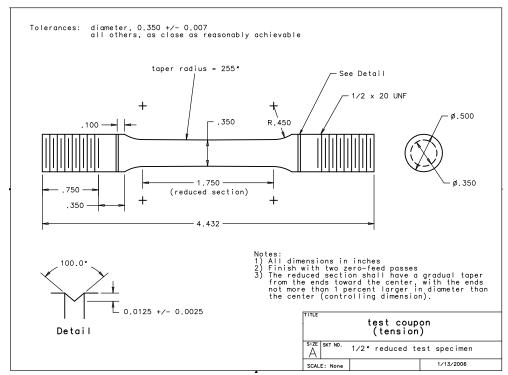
Round, small-size 0.350-inch diameter quasi-static tensile test specimen used for additional testing of ½-inch thick plate.
